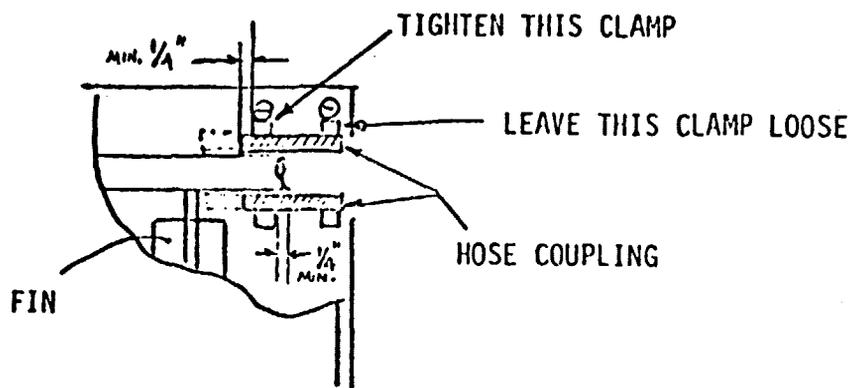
CLAMP MOVED TO THE EDGE OF THE HEADER
